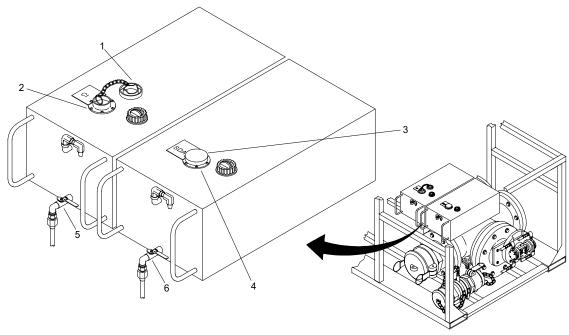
Fuel Additive Injector Assembly CI and SDA Tanks.
